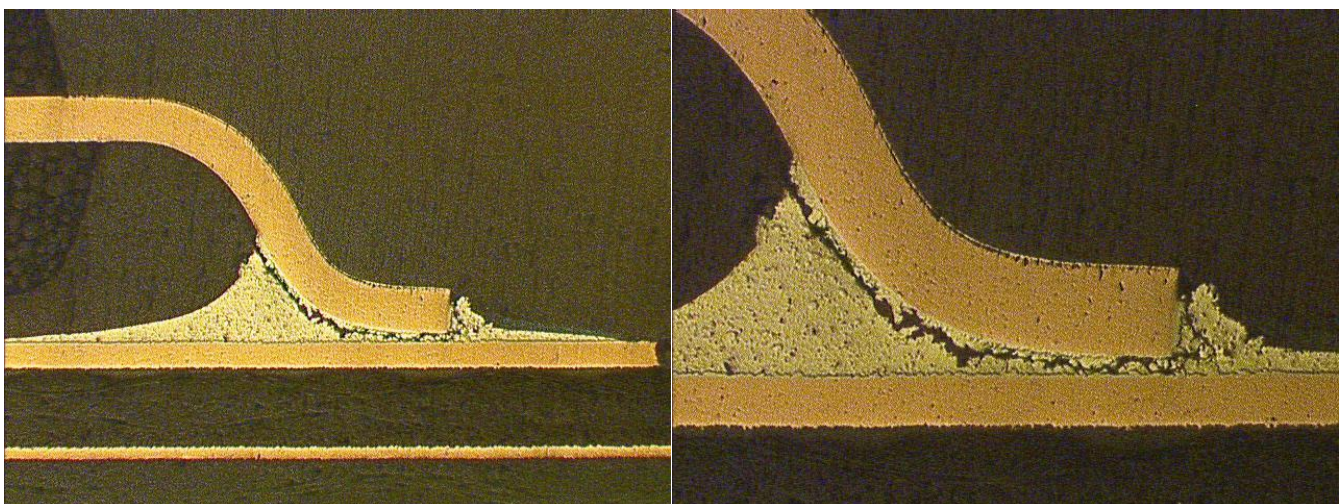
TQFP-144 Solder Joints, Board 167, Component U57, SAC305/NiPdAu, Failed @ 3478 Cycles
